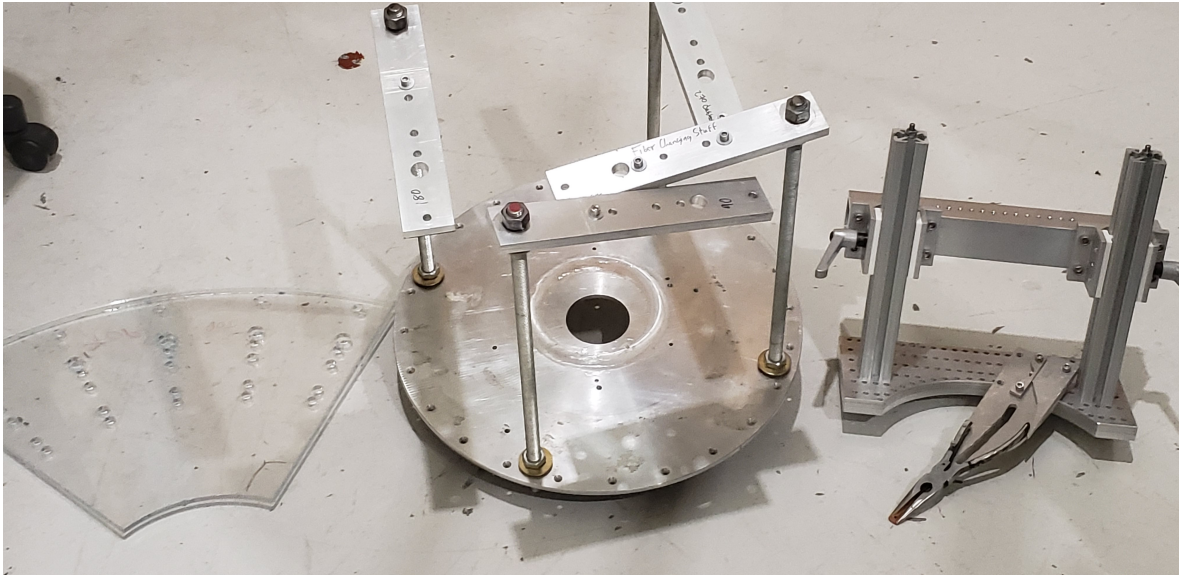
Left: CO2 laser cut alignment jigs that mount to the compensator platform to keep apparatus aligned as it is lowered and raised. Middle: platform that extends below the compensators allows for enough travel to install a fiber. Right: jig that mounts to the apparatus to keep fiber aligned with shroud while installing a pendulum.
